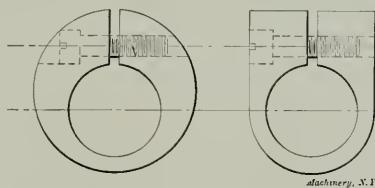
Clamp Collars for Spring Screw Threading Die.
